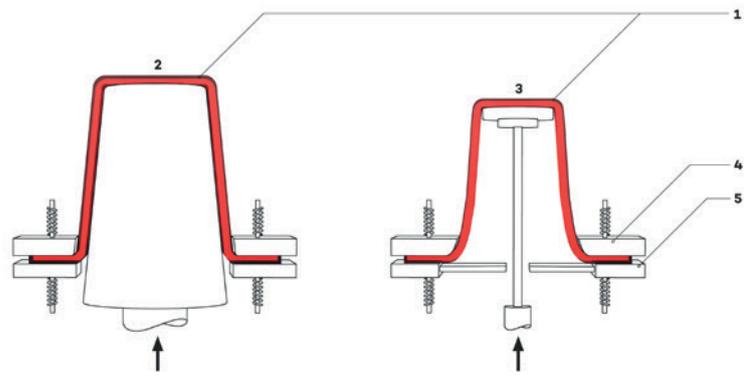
Thermoforming with undercut and solid plug, respectively; PLEXIGLAS® (1), solid plug (2), undercut plug (3), clamping ring (4), hold-down ring (5).
